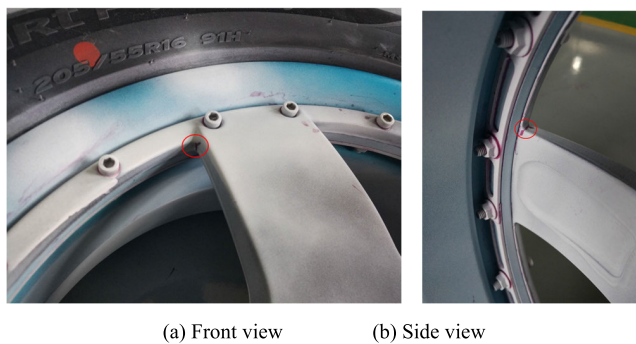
Radial fatigue damage parts and cracks of wheels.
